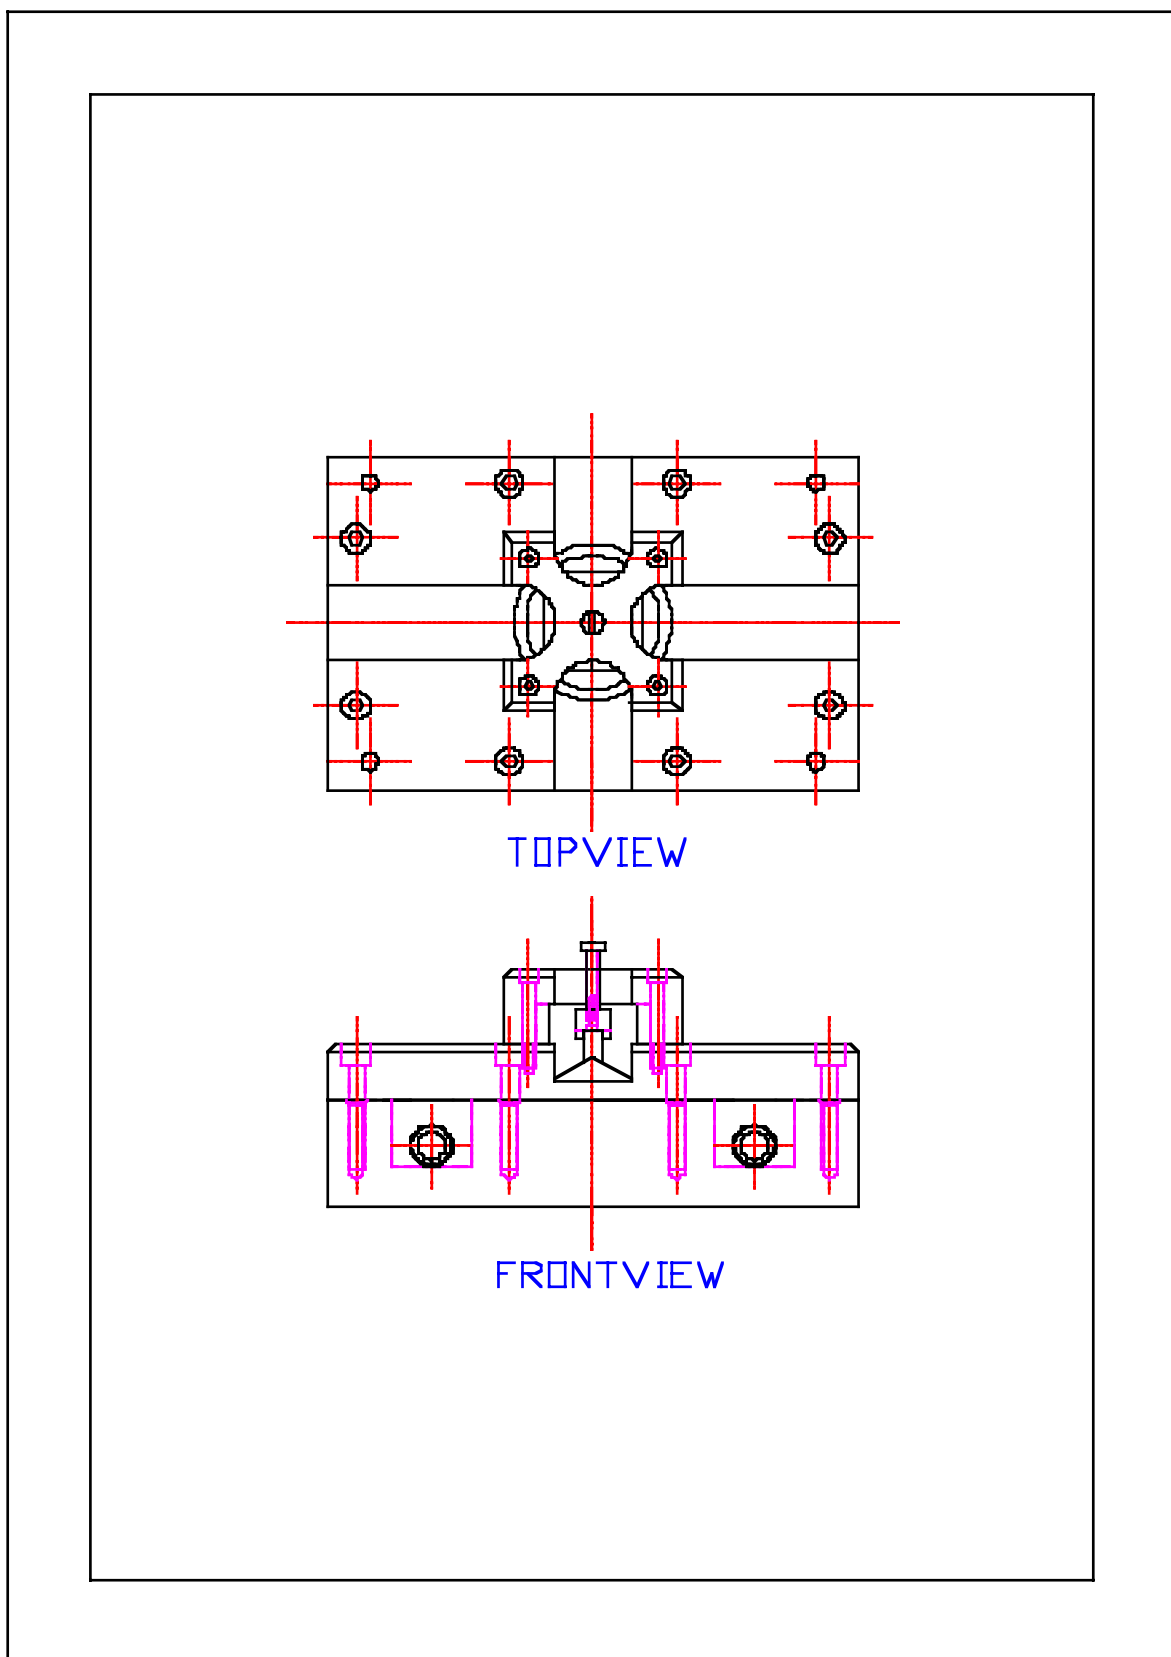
Assembled top and front view of the parallel plate flow cell.
